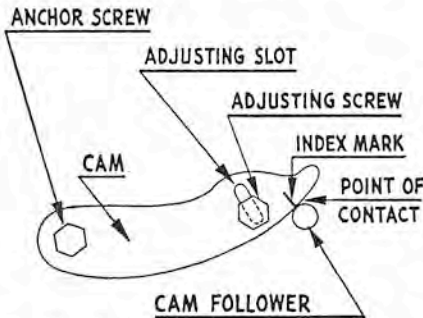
To synchronize the throttle linkage with magneto advance, index mark on cam must register with cam follower as throttle valve starts to open.
